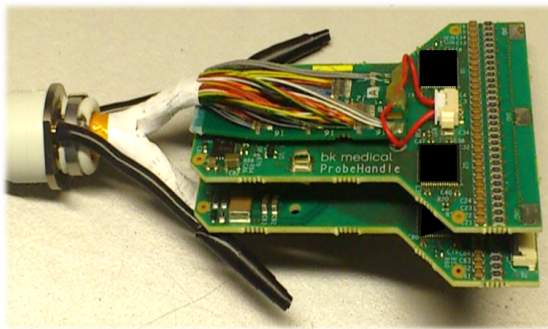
PCBs to be put inside the probe handle of a TABLA prototype. A cable is attached to the outside side of each PCB.
